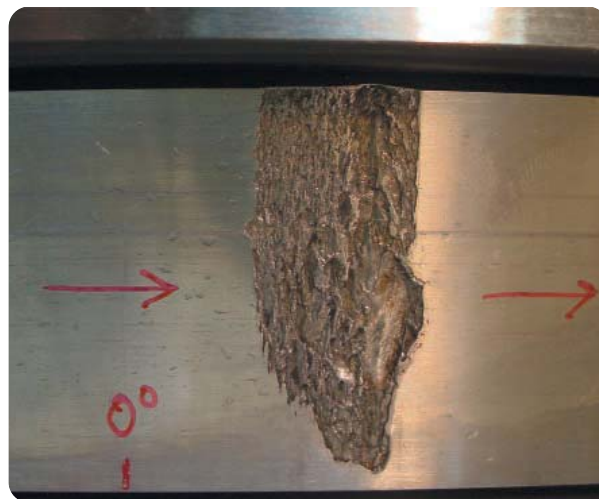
Spalled wind turbine gearbox bearing identified using VHM, from [52]
